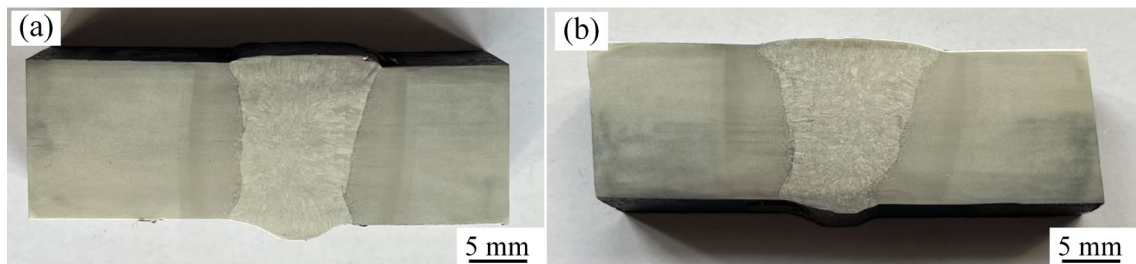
Macroscopic morphology of welded joints of 12MnNiVR steel with different compositions: (a) TFS joint, (b) TCS joint
